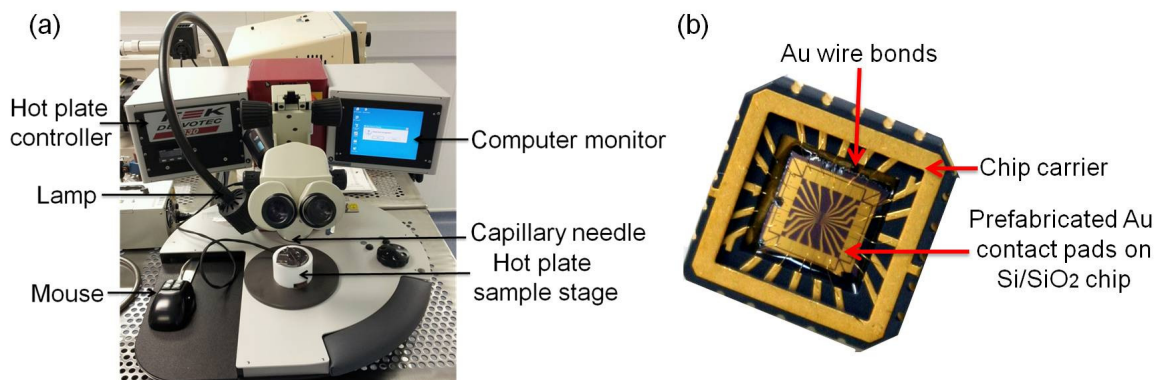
Photographs showing (a) the wire bonding machine used in this work to electrically connect the gold prefabricated contact pads on the silicon chip with the terminals of chip carrier, and (b) example of chip carrier bonded to the contact pads by gold wires [49].
